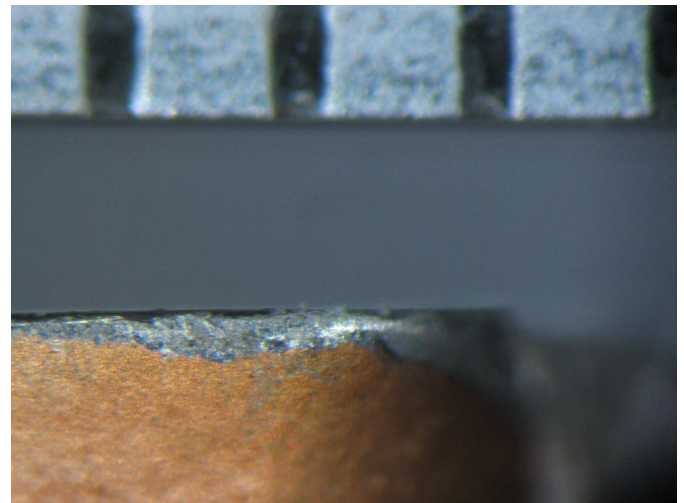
TOOL WEAR FOR AGGRESSIVE CUTTING CONDITIONS (TEST 36)
